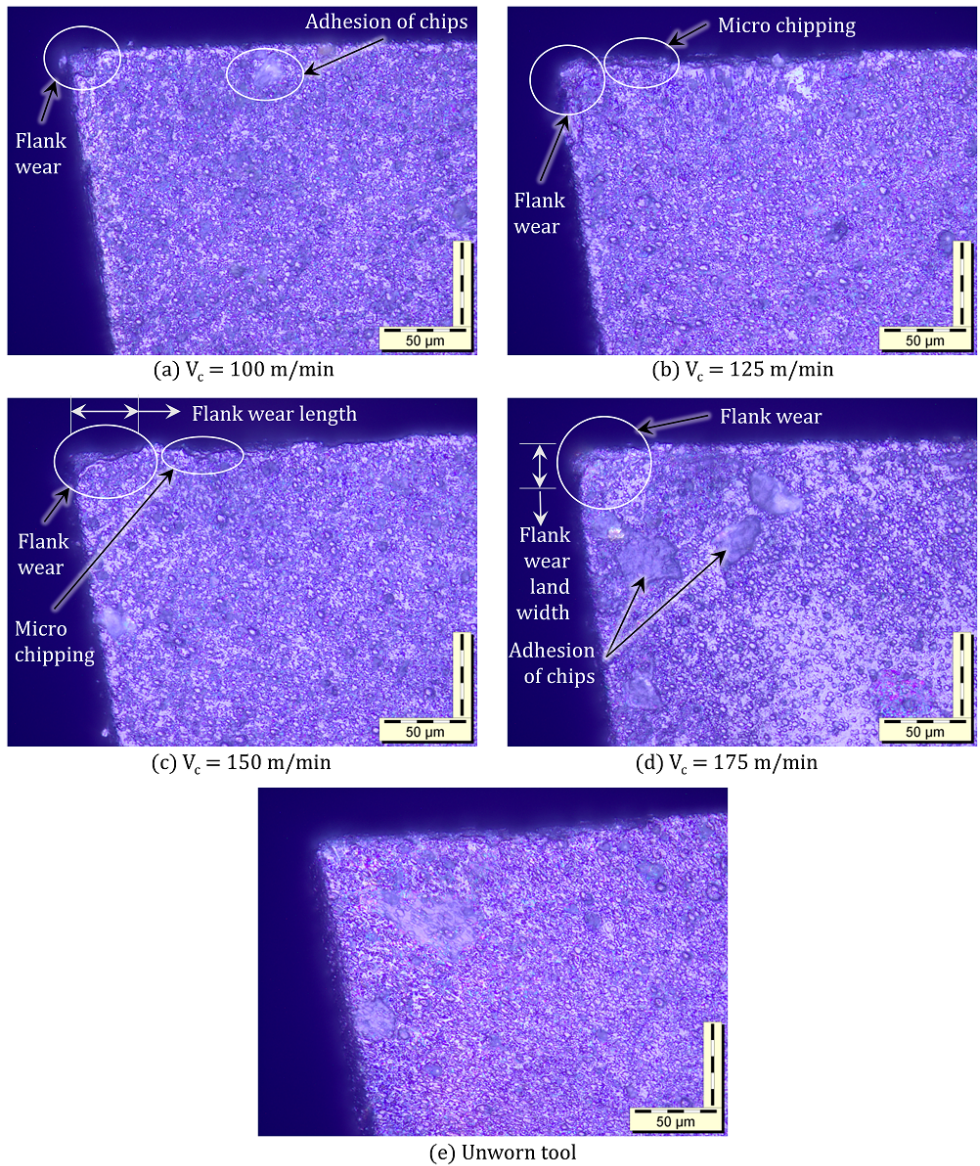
Flank wear on the cutting inserts at different cutting speeds
